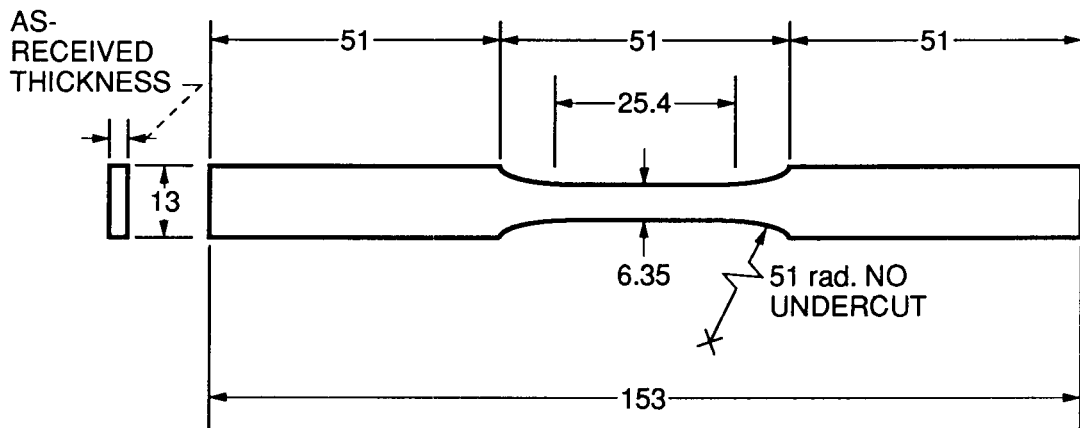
SiC/Ti-15-3 composite test specimen. (All dimensions are in mm.)
